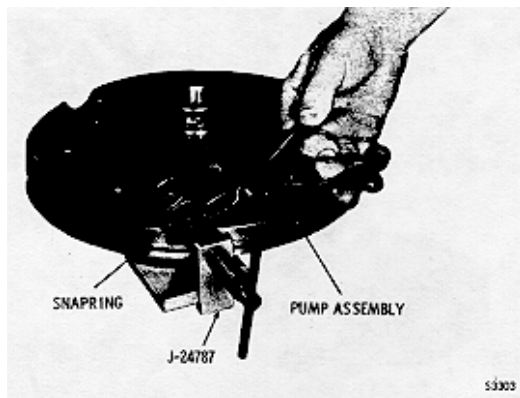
Removing (or installing) main-pressure regulator valve
